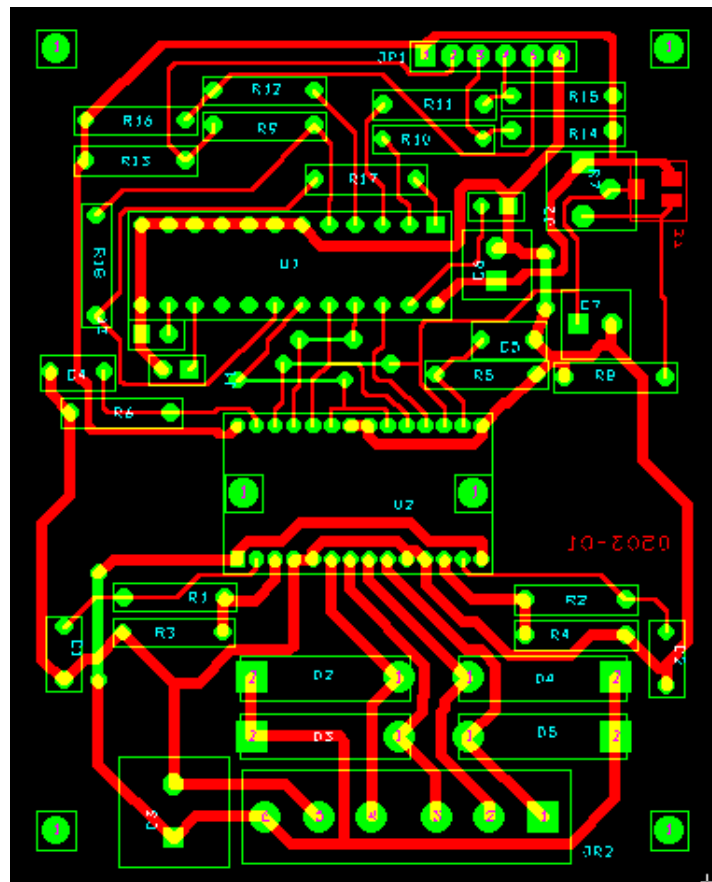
A screen capture of the PCB Layout shows how the components are connected together. Camera ready artwork for PCB fabrication is shown in page 13.
